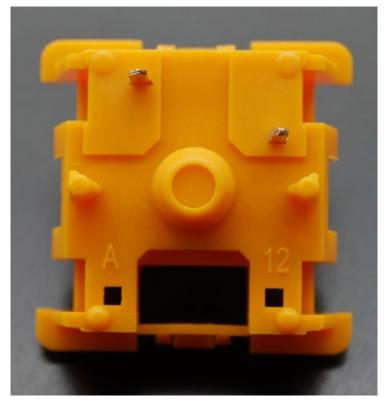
Bottom housing external design of the Huano Pineapples showing dual mold marking locations as well as PCB mounting pins, which are a first for Huano-made switches.
